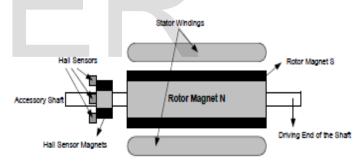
Rotor and Hall sensors of PMBLDC motor
